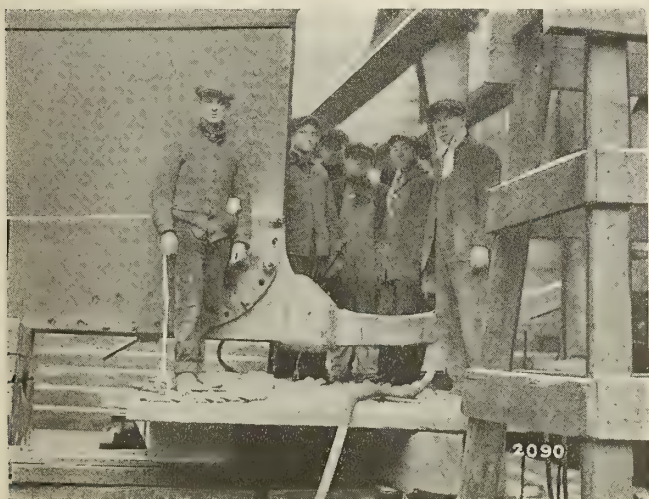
S. S. *Chas. O. Jenkins* of Jenkins Steamship Company. Section 14 by 18 Inches, Welded November 10, 1917. 700 Pounds Thermit Used. Time Used in Making Repair, 37 Hours, 10 Hours Preheating.
